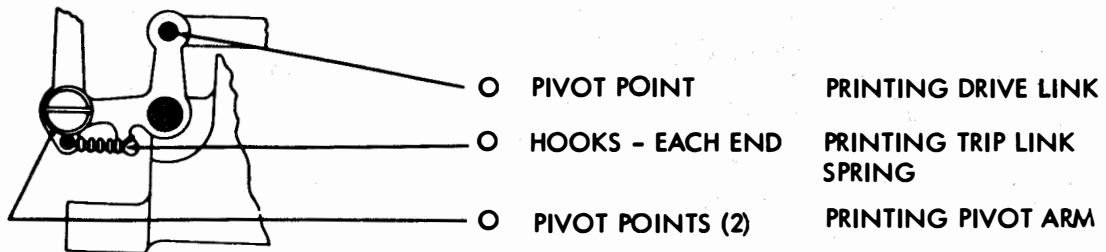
Printing Drive Link, Trip Link and Pivot Arm, Left Side View
